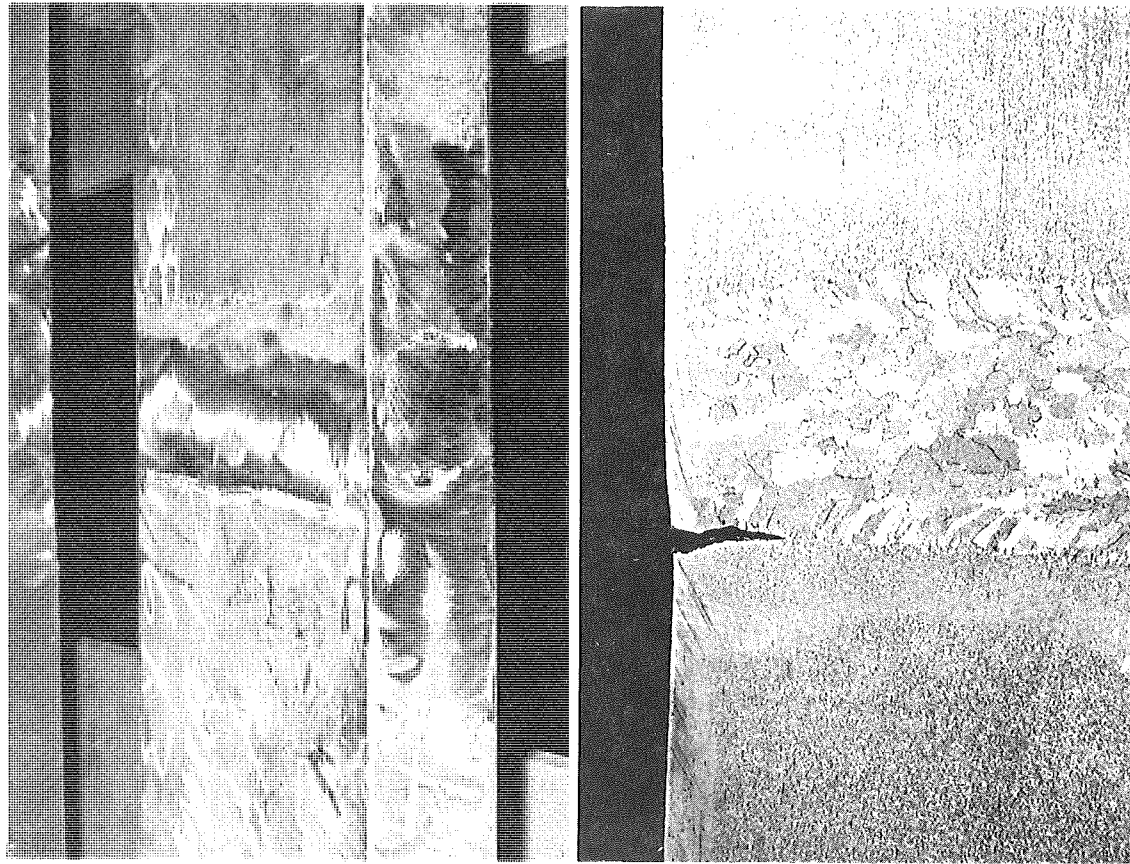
Lack-of-fusion edge defect that occurred in a dry shoe electroslag weld (above). Macrograph, below, shows the extent that such fusion defects may extend into the plate (about 1-in. in this case).
